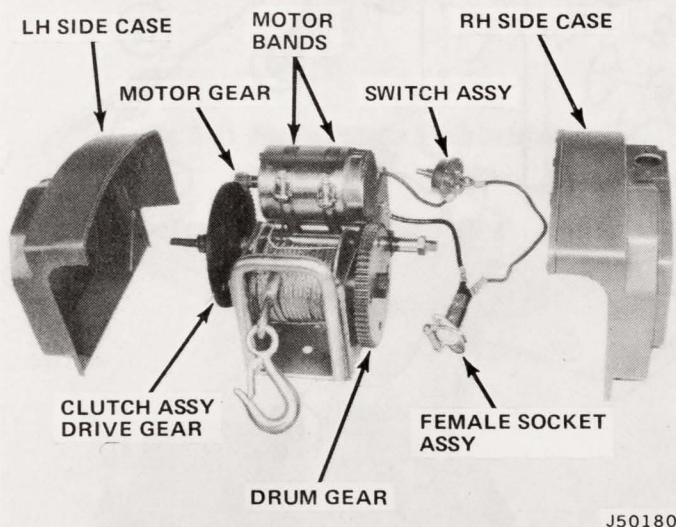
Electric Portable Winch—Side Cases Removed
